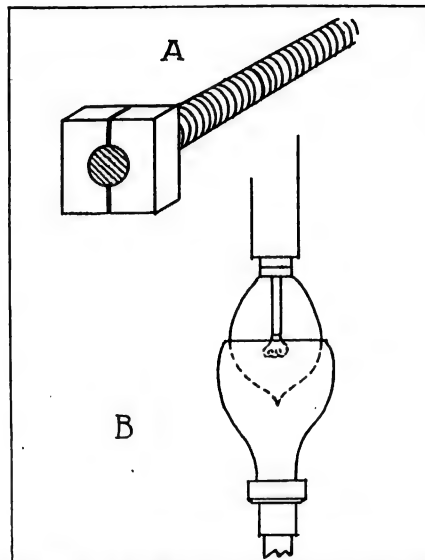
A, Method for Holding Threaded Pieces. B, Light Globe Remover.
